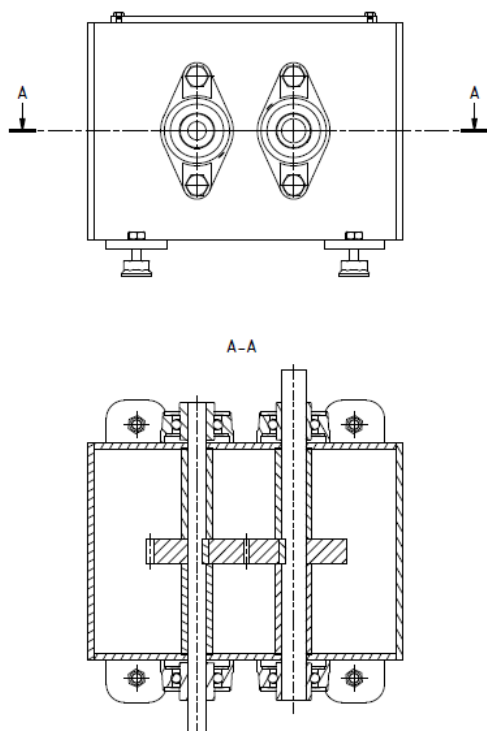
Technical drawing of the test gearbox – front view and section A–A.
